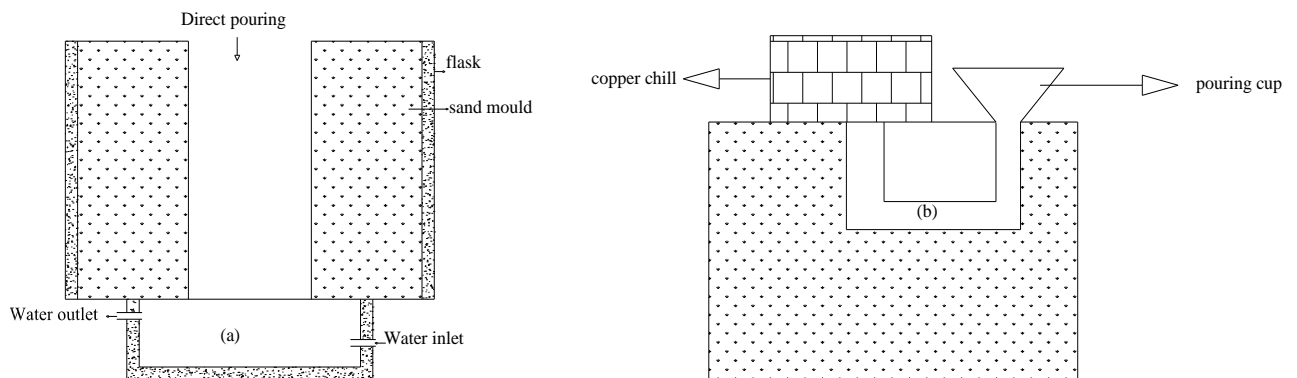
Sand moulds with chilling arrangements as follows: (a) top poured mould with water-cooled copper chill at the bottom; (b) bottom-poured mould with water-cooled heavy copper chill at the top
